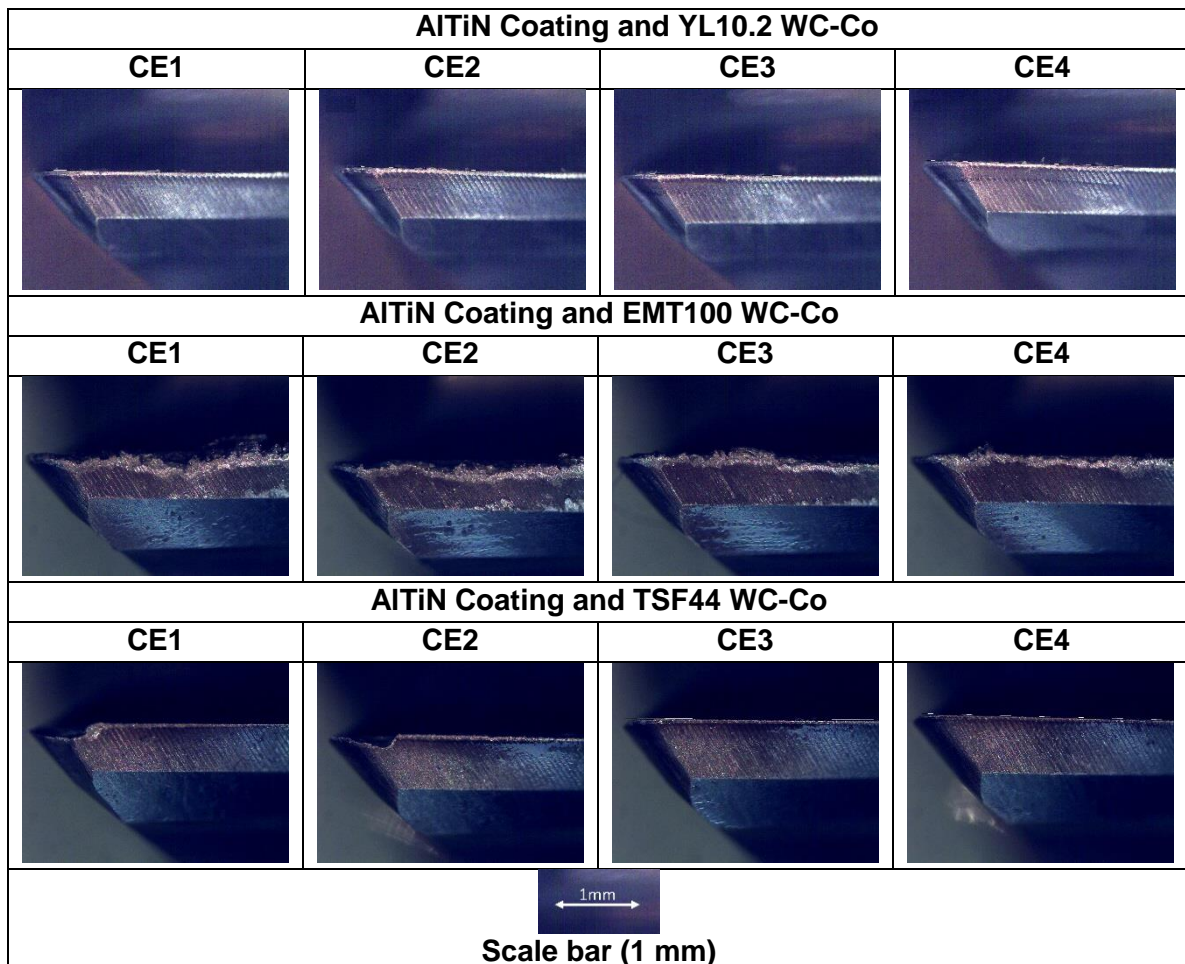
Tool wear images of three solid WC-Co with AlTiN coating
